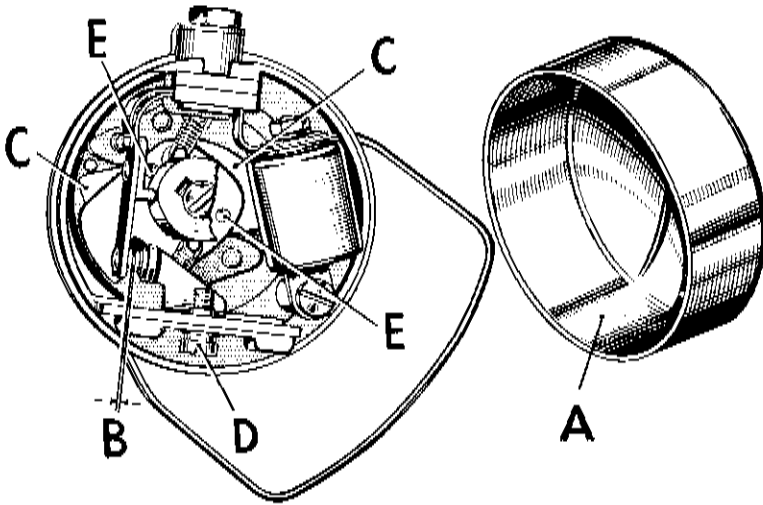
A. Contact Breaker and Auto Advance Mechanism.
